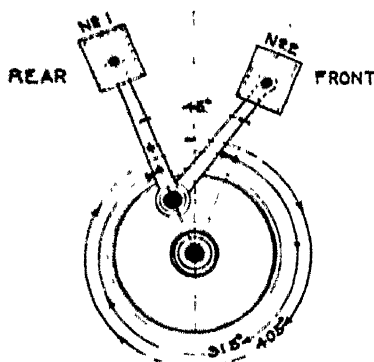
Arrangement of connecting rods and crank for two-cylinder 45 deg., V-type engine.
